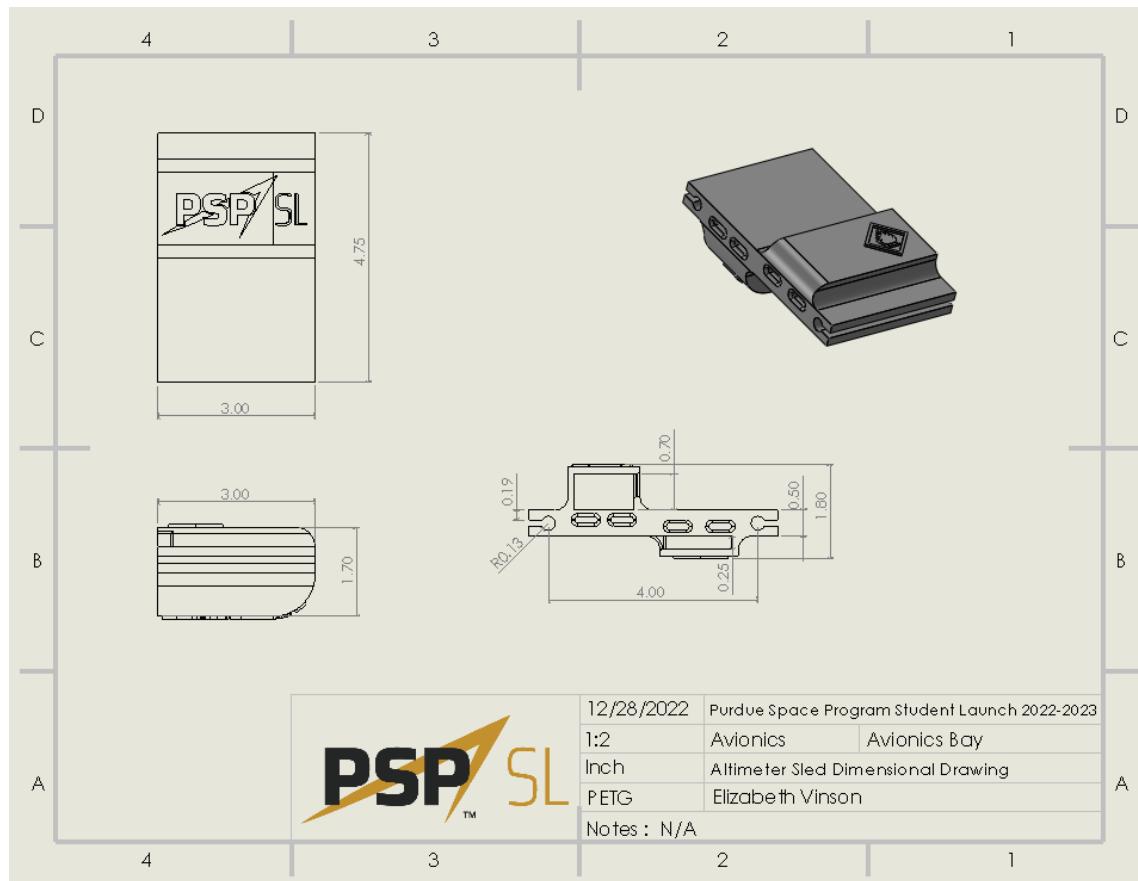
Altimeter Sled Technical Drawing
